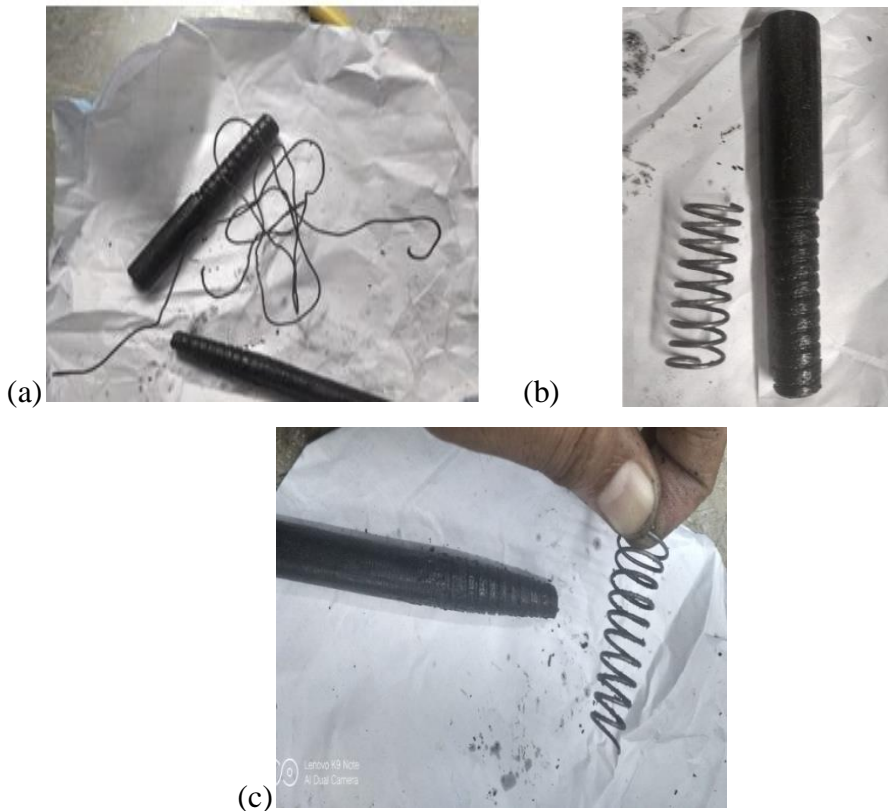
Separation of spring included (a) clamping wires, (b) cylindrical shape helical spring, and (c) conical shape helical spring
